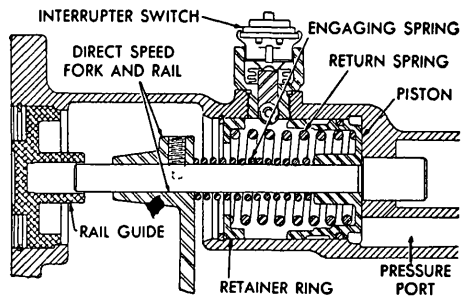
Shifting mechanism for direct drive in hydraulic-operated transmission. 1946-48 Chrysler and De Soto
